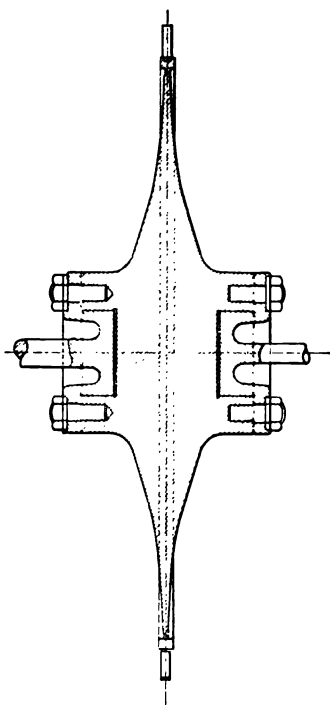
Section of Turbine Wheel of the Larger Sizes.
